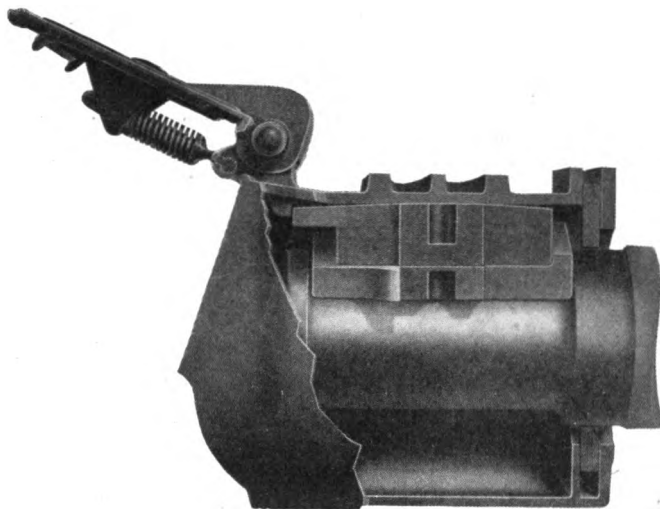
How the Journal Box, Wedge and Bearing Set on the Axle Journal.
